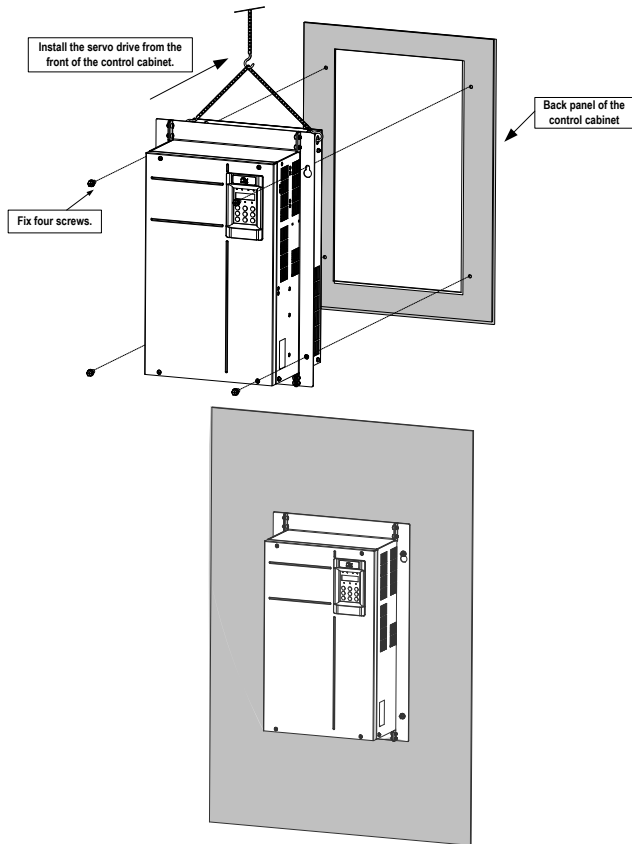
Embedded mounting of the IS580 of sheet metal housing
